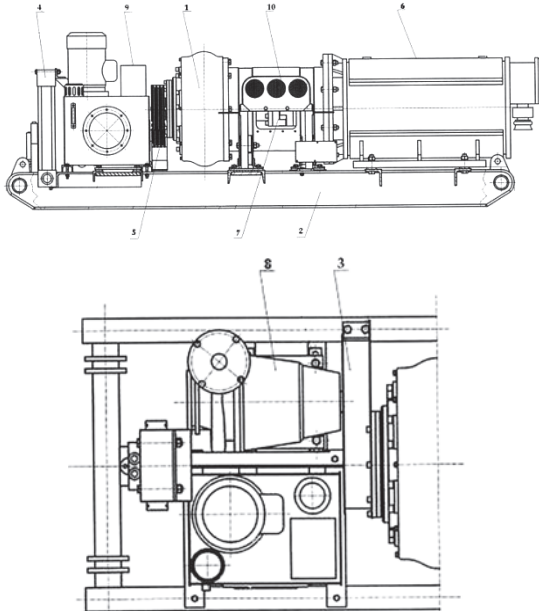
Structure of the plunger pumps: 1 - radius piston pump of T7-320-40, 2 – frame, 3- shield, 4 - water filter, 5 - belt transmission, 6 – motor, 7 - flexible clutch, 8 - rotational pump, 9 - hydraulic unit, 10 - manometers unit
